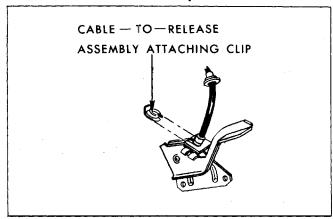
Hood Latch Cable-to-Release Handle Attachment -H-15 and 77 Styles
